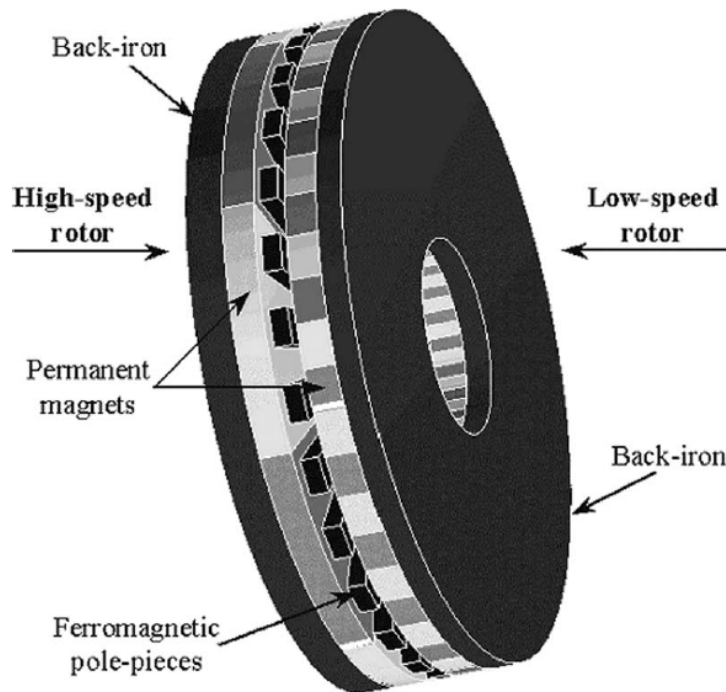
Axial-Flux Magnetic Gear, (17)
